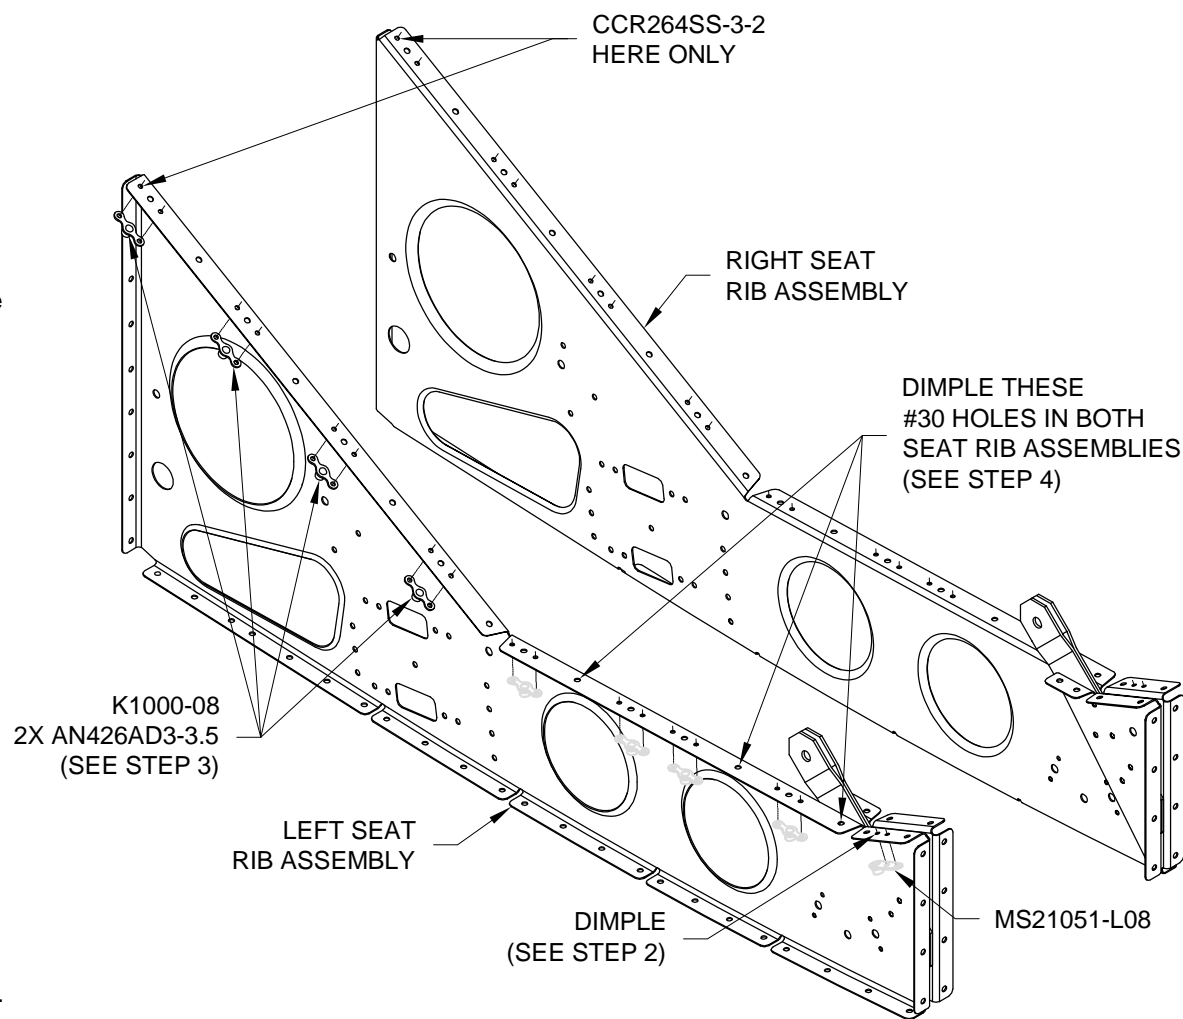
PREPARING SEAT RIB ASSEMBLIES
